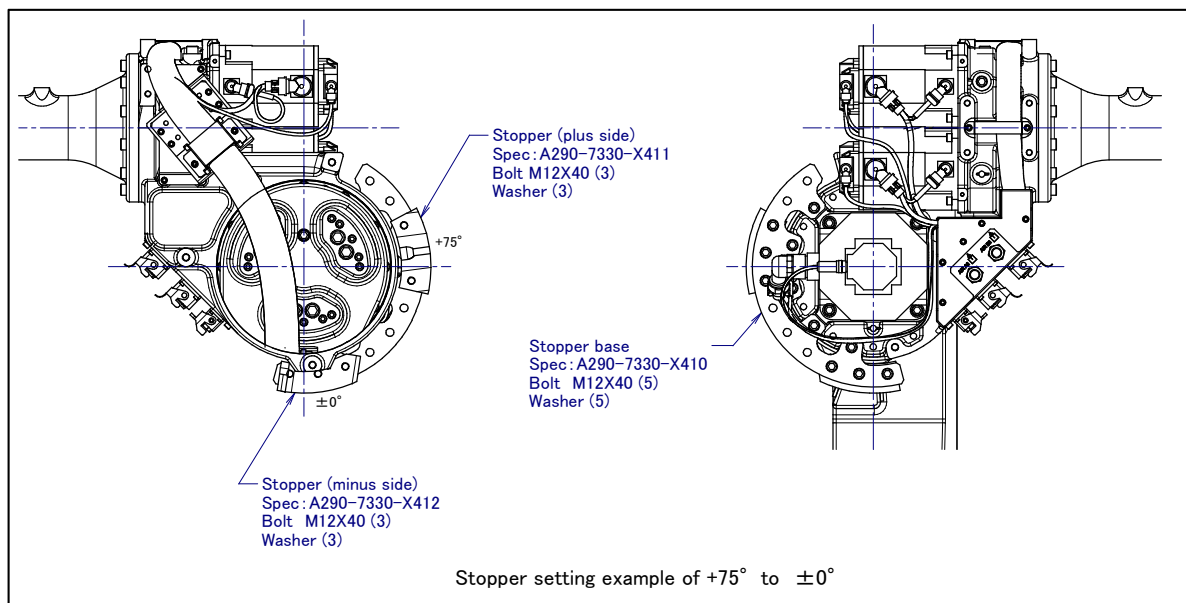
(j) Setting example of J3-axis adjustable mechanical stopper
